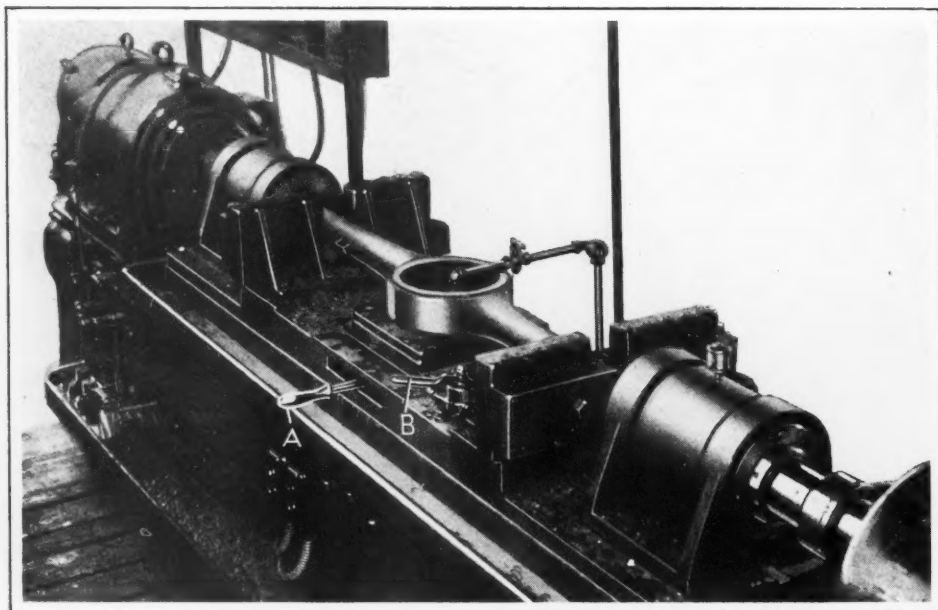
Two-way Hydraulic-feed Machine Employed for Rough-boring the Housing Ends
